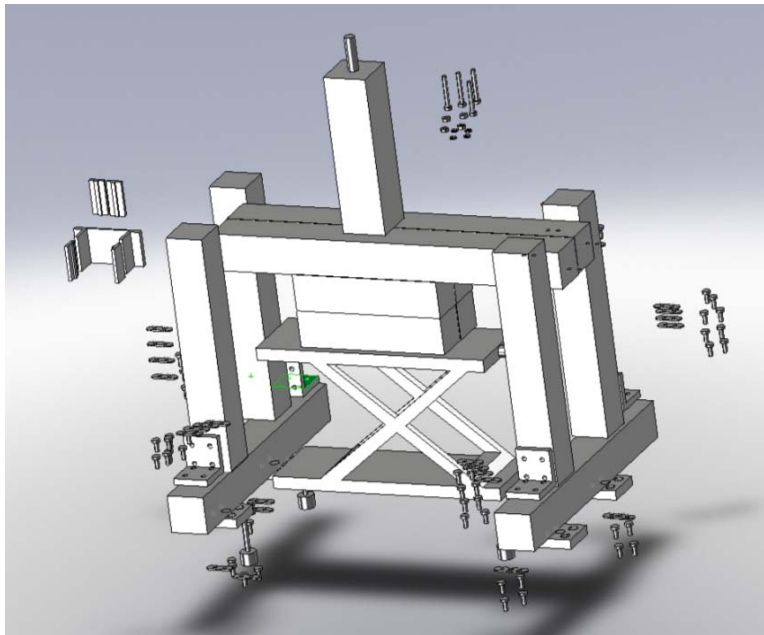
A stand for the hydraulic actuator, drawn in the Solidworks software
